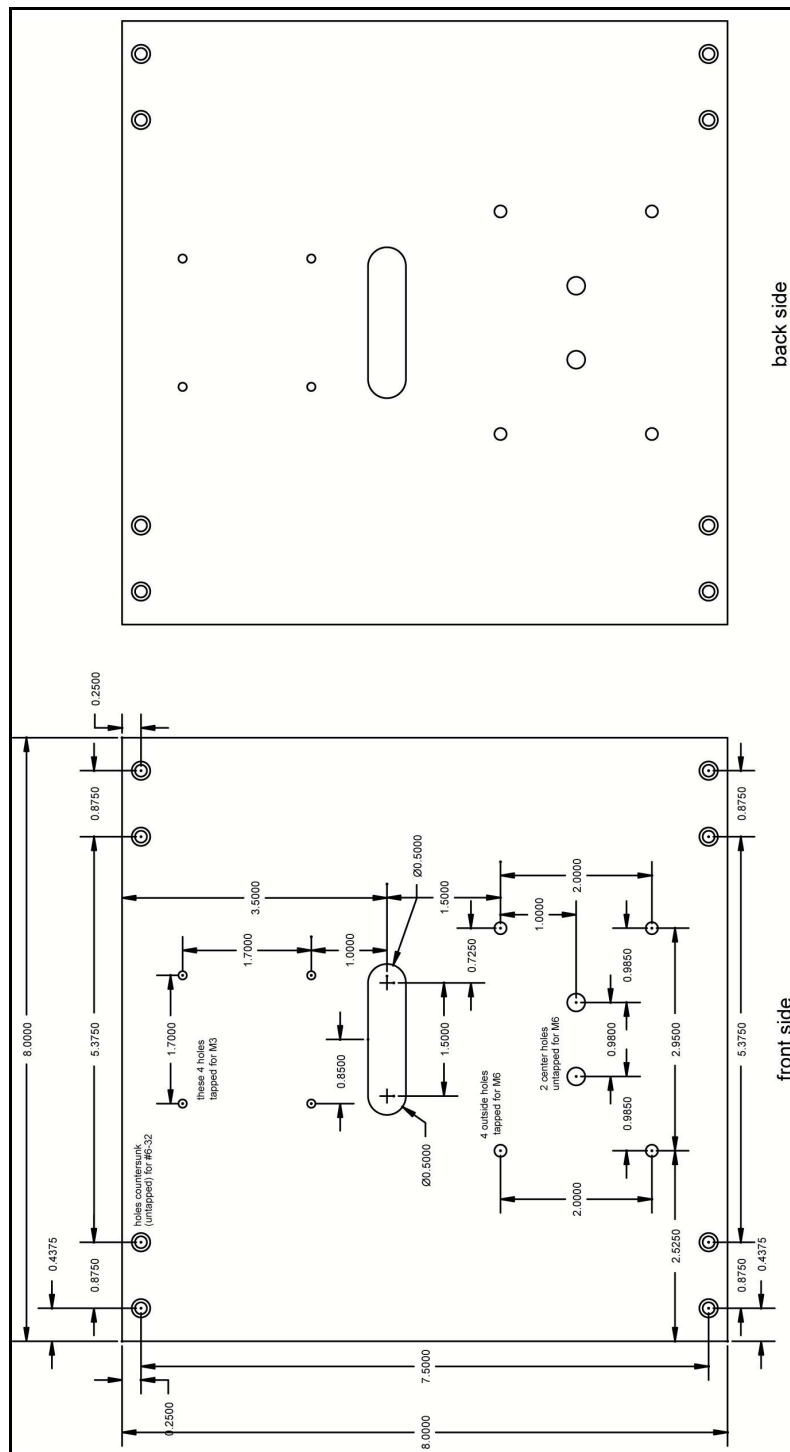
Top and bottom view of the Y plate. The Y plate screws into the two linear slides on the X plate and is stepper motor driven. A large angle bracket is mounted to the Y plate that is used to mount the scan head.
